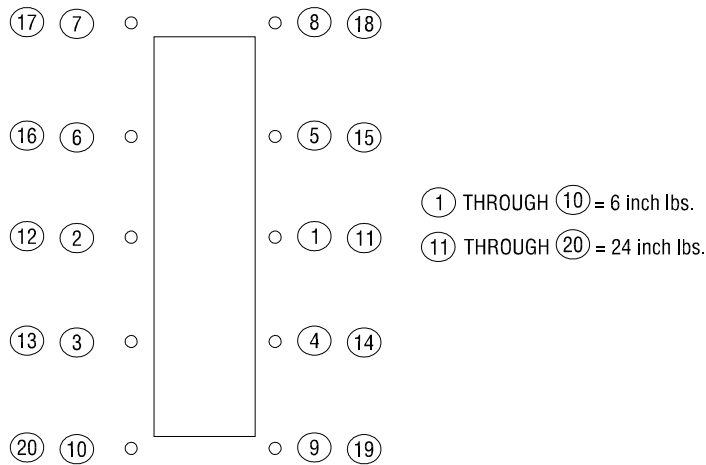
7312-NM04 Panel Cut-out and Hole Pattern
